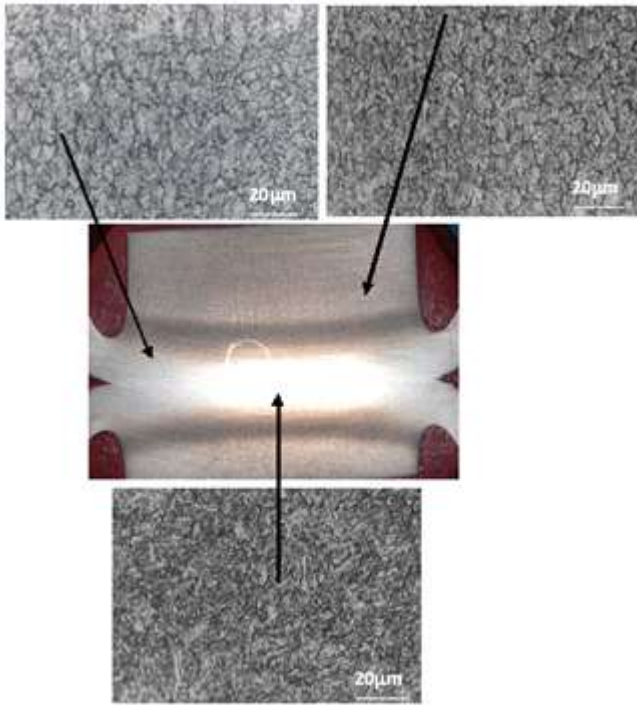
Friction weld and its cross sectional view (as-welded condition)
